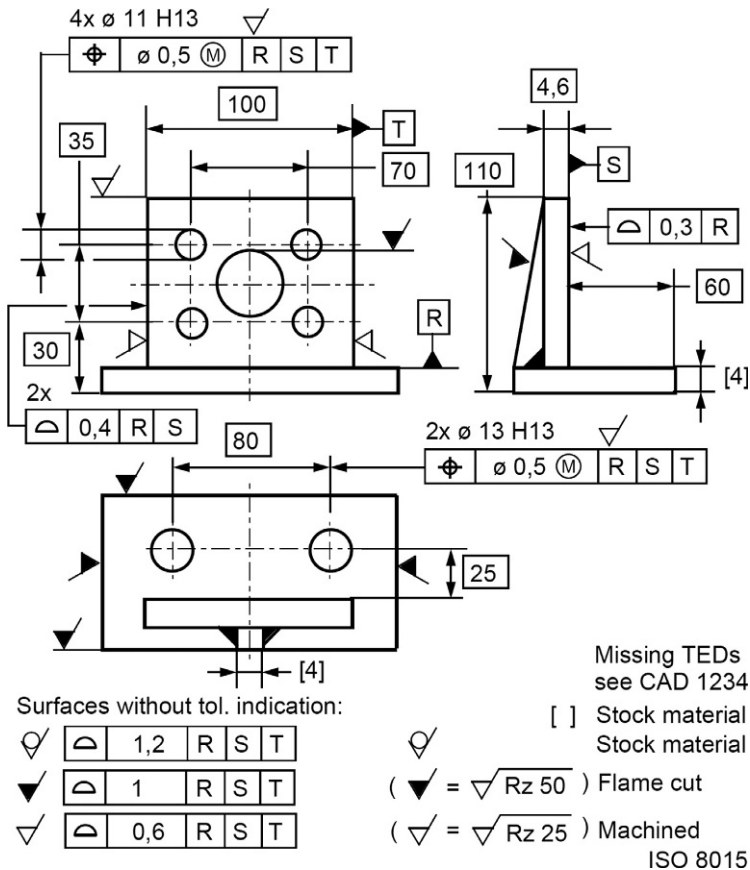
Welded part with general tolerances for stock material, flame cutting and machined surfaces
